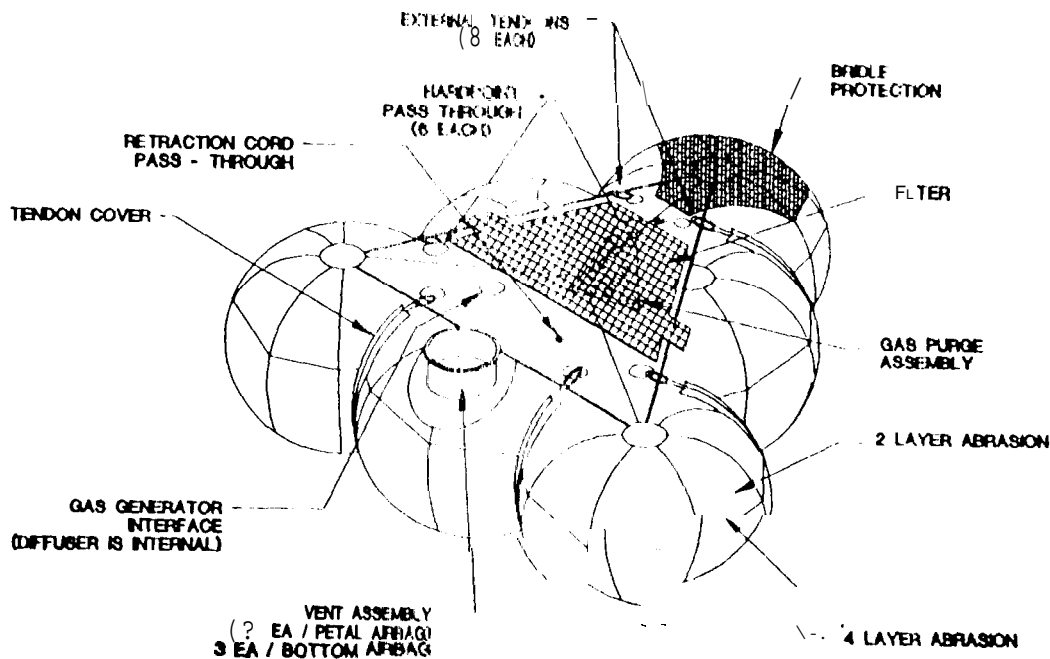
Single airbag assembly drawing. (Chuck Sandy)
